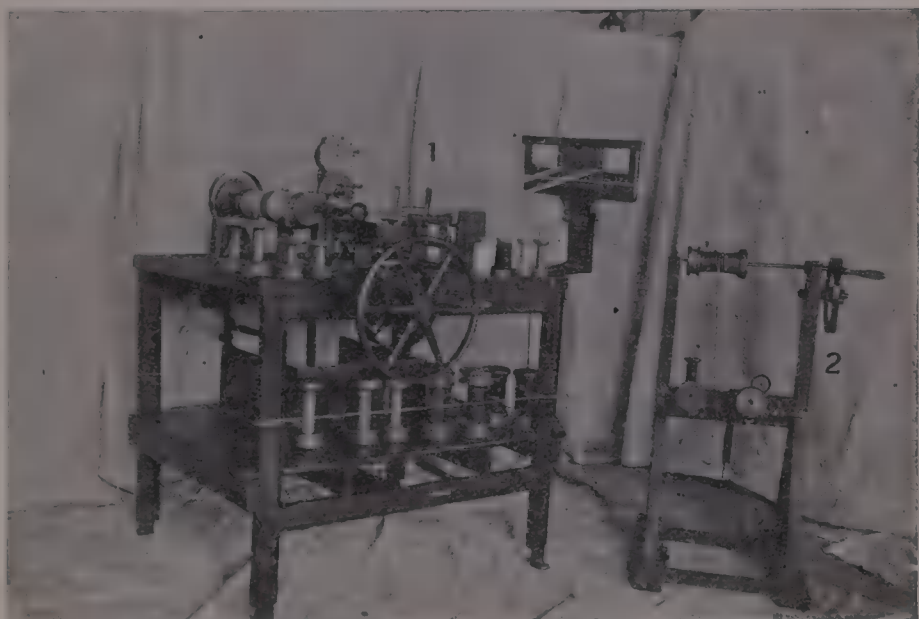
1. Edge-warping machine and anchor bobbins. 2. Hand-drive edge take-off machine.
